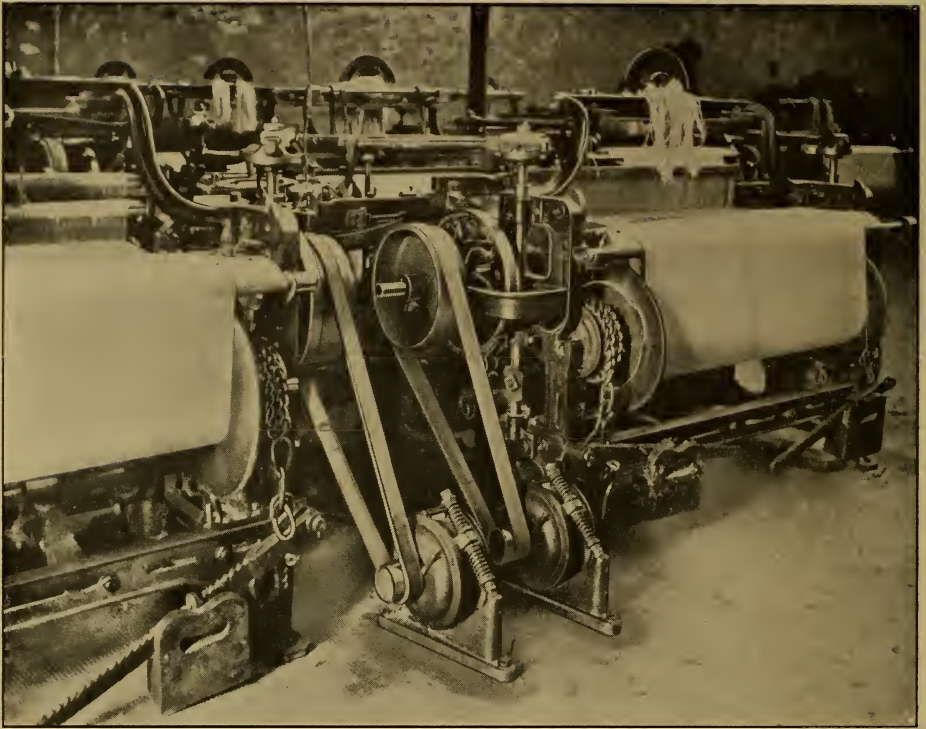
LOOMS DRIVEN BY INDIVIDUAL MOTORS, BY SIEMENS BROS., LTD. THE MOTORS ARE CARRIED IN SPRING SUSPENSION, INSURING UNIFORM BELT TENSION
